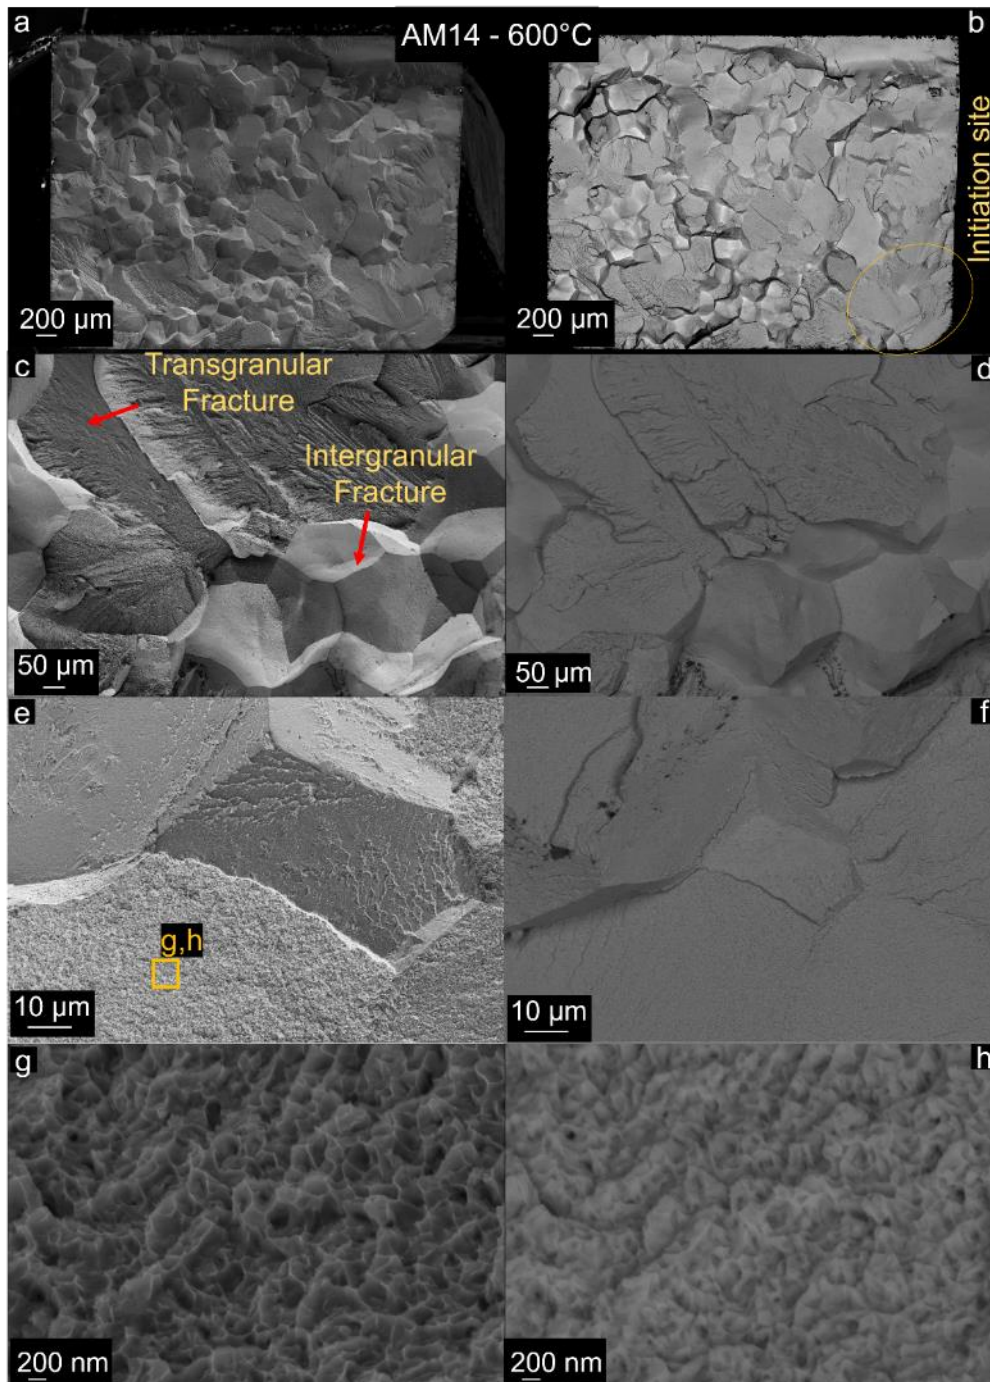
SEM micrographs of fracture surfaces of AM14 bending specimens. The compression side is upwards, while the tension side is downwards and has grinded edges. a,b) Typical fracture surface morphology using SE and BSE detectors, respectively. c,d) Enlarged view of the microstructure in SE and BSE modes. e,f) Highly-magnified views, using SE and BSE modes, respectively. g,h) Enlarged view of the rectangle shown in (e), in SE and BSE modes.
